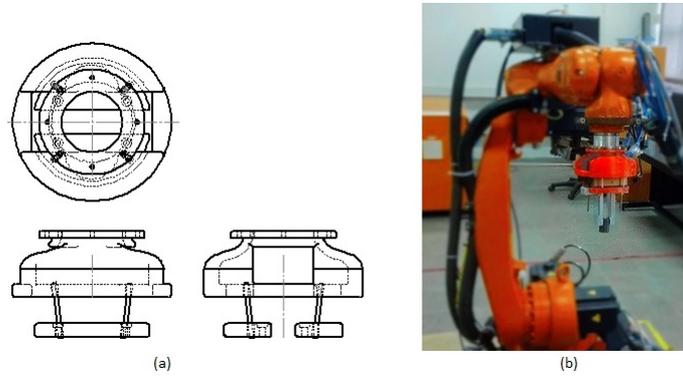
(a) Projection drawings of the final design (b) Final Prototype attached to a KUKA KR-5 robot for testing.
